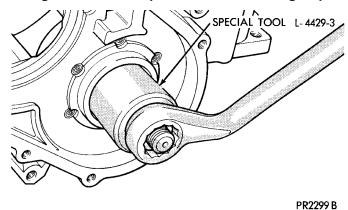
Install Rear Planetary Annulus Gear Bearing Cup
